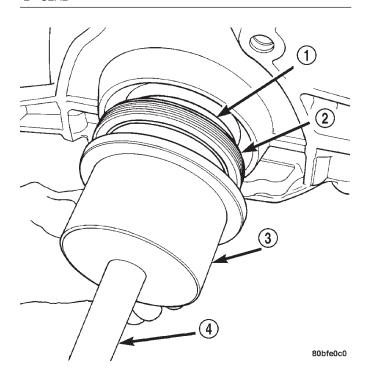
Crankshaft Seal and Special Tools 6926-2 & C-4171
